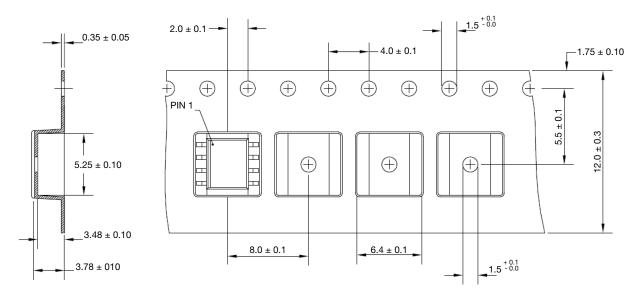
Tape and Reel Packing (2000 pieces on reel)
